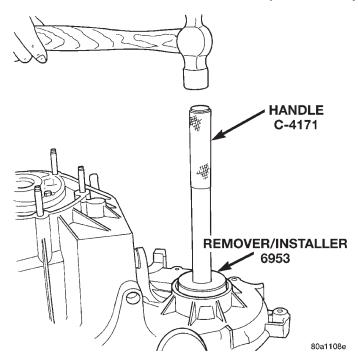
Remove Output Shaft Front Bearing bore is chamfered at the top. Install the bearing so it is flush with the lower edge of this chamfer (Fig. 14).
